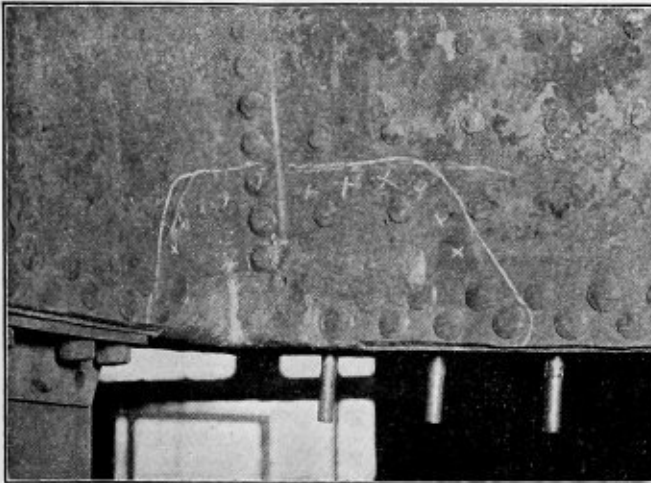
DEFECTIVE FIRE-BOX SHEETS REPAIRED BY ELECTRIC WELDING
